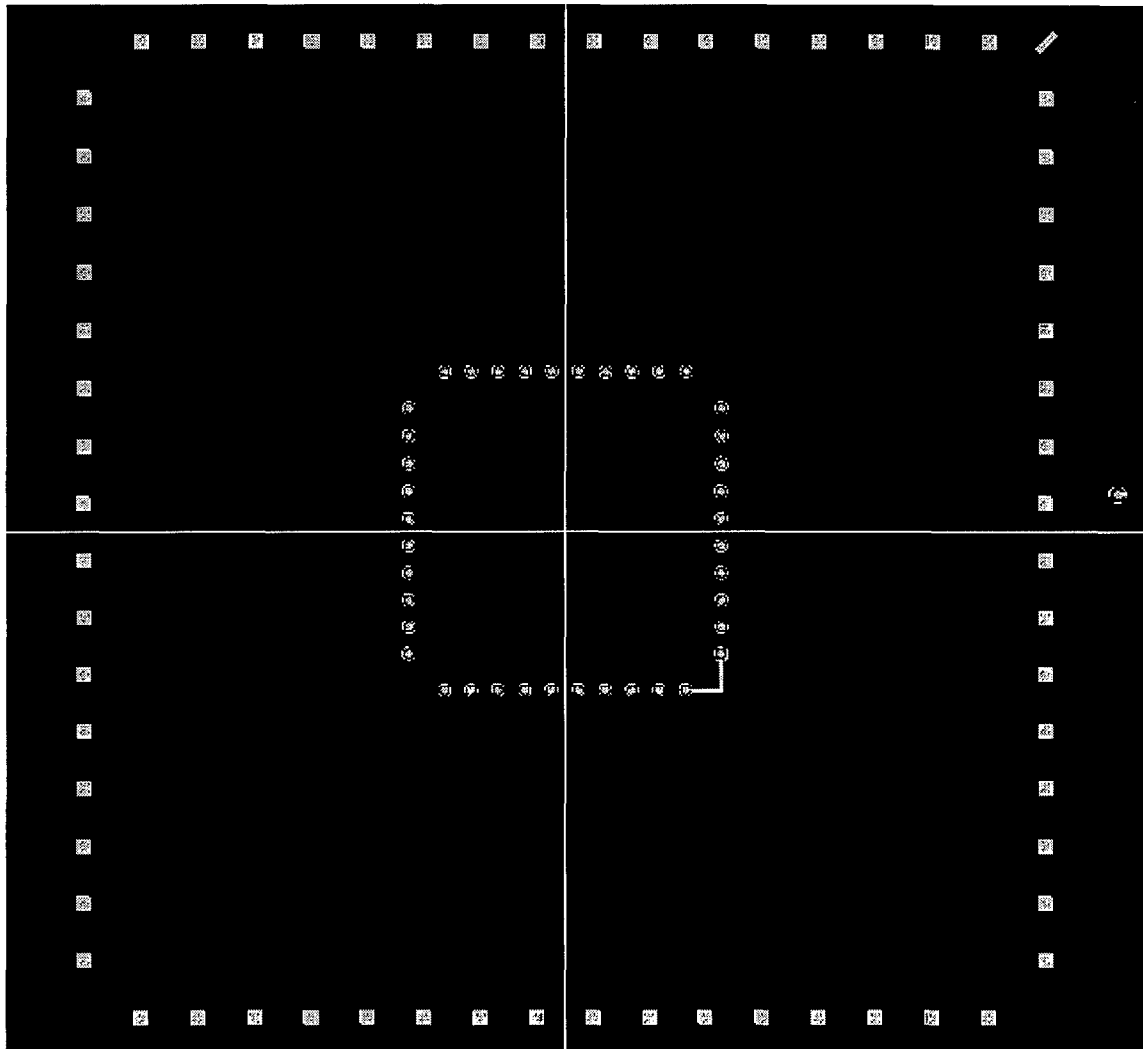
SmartMUMPs Pad Frame supplied by MCNC [6]. The Ecosys die is soldered directly to the inner padframe. The outer padframe is wire bonded to a standard package.
